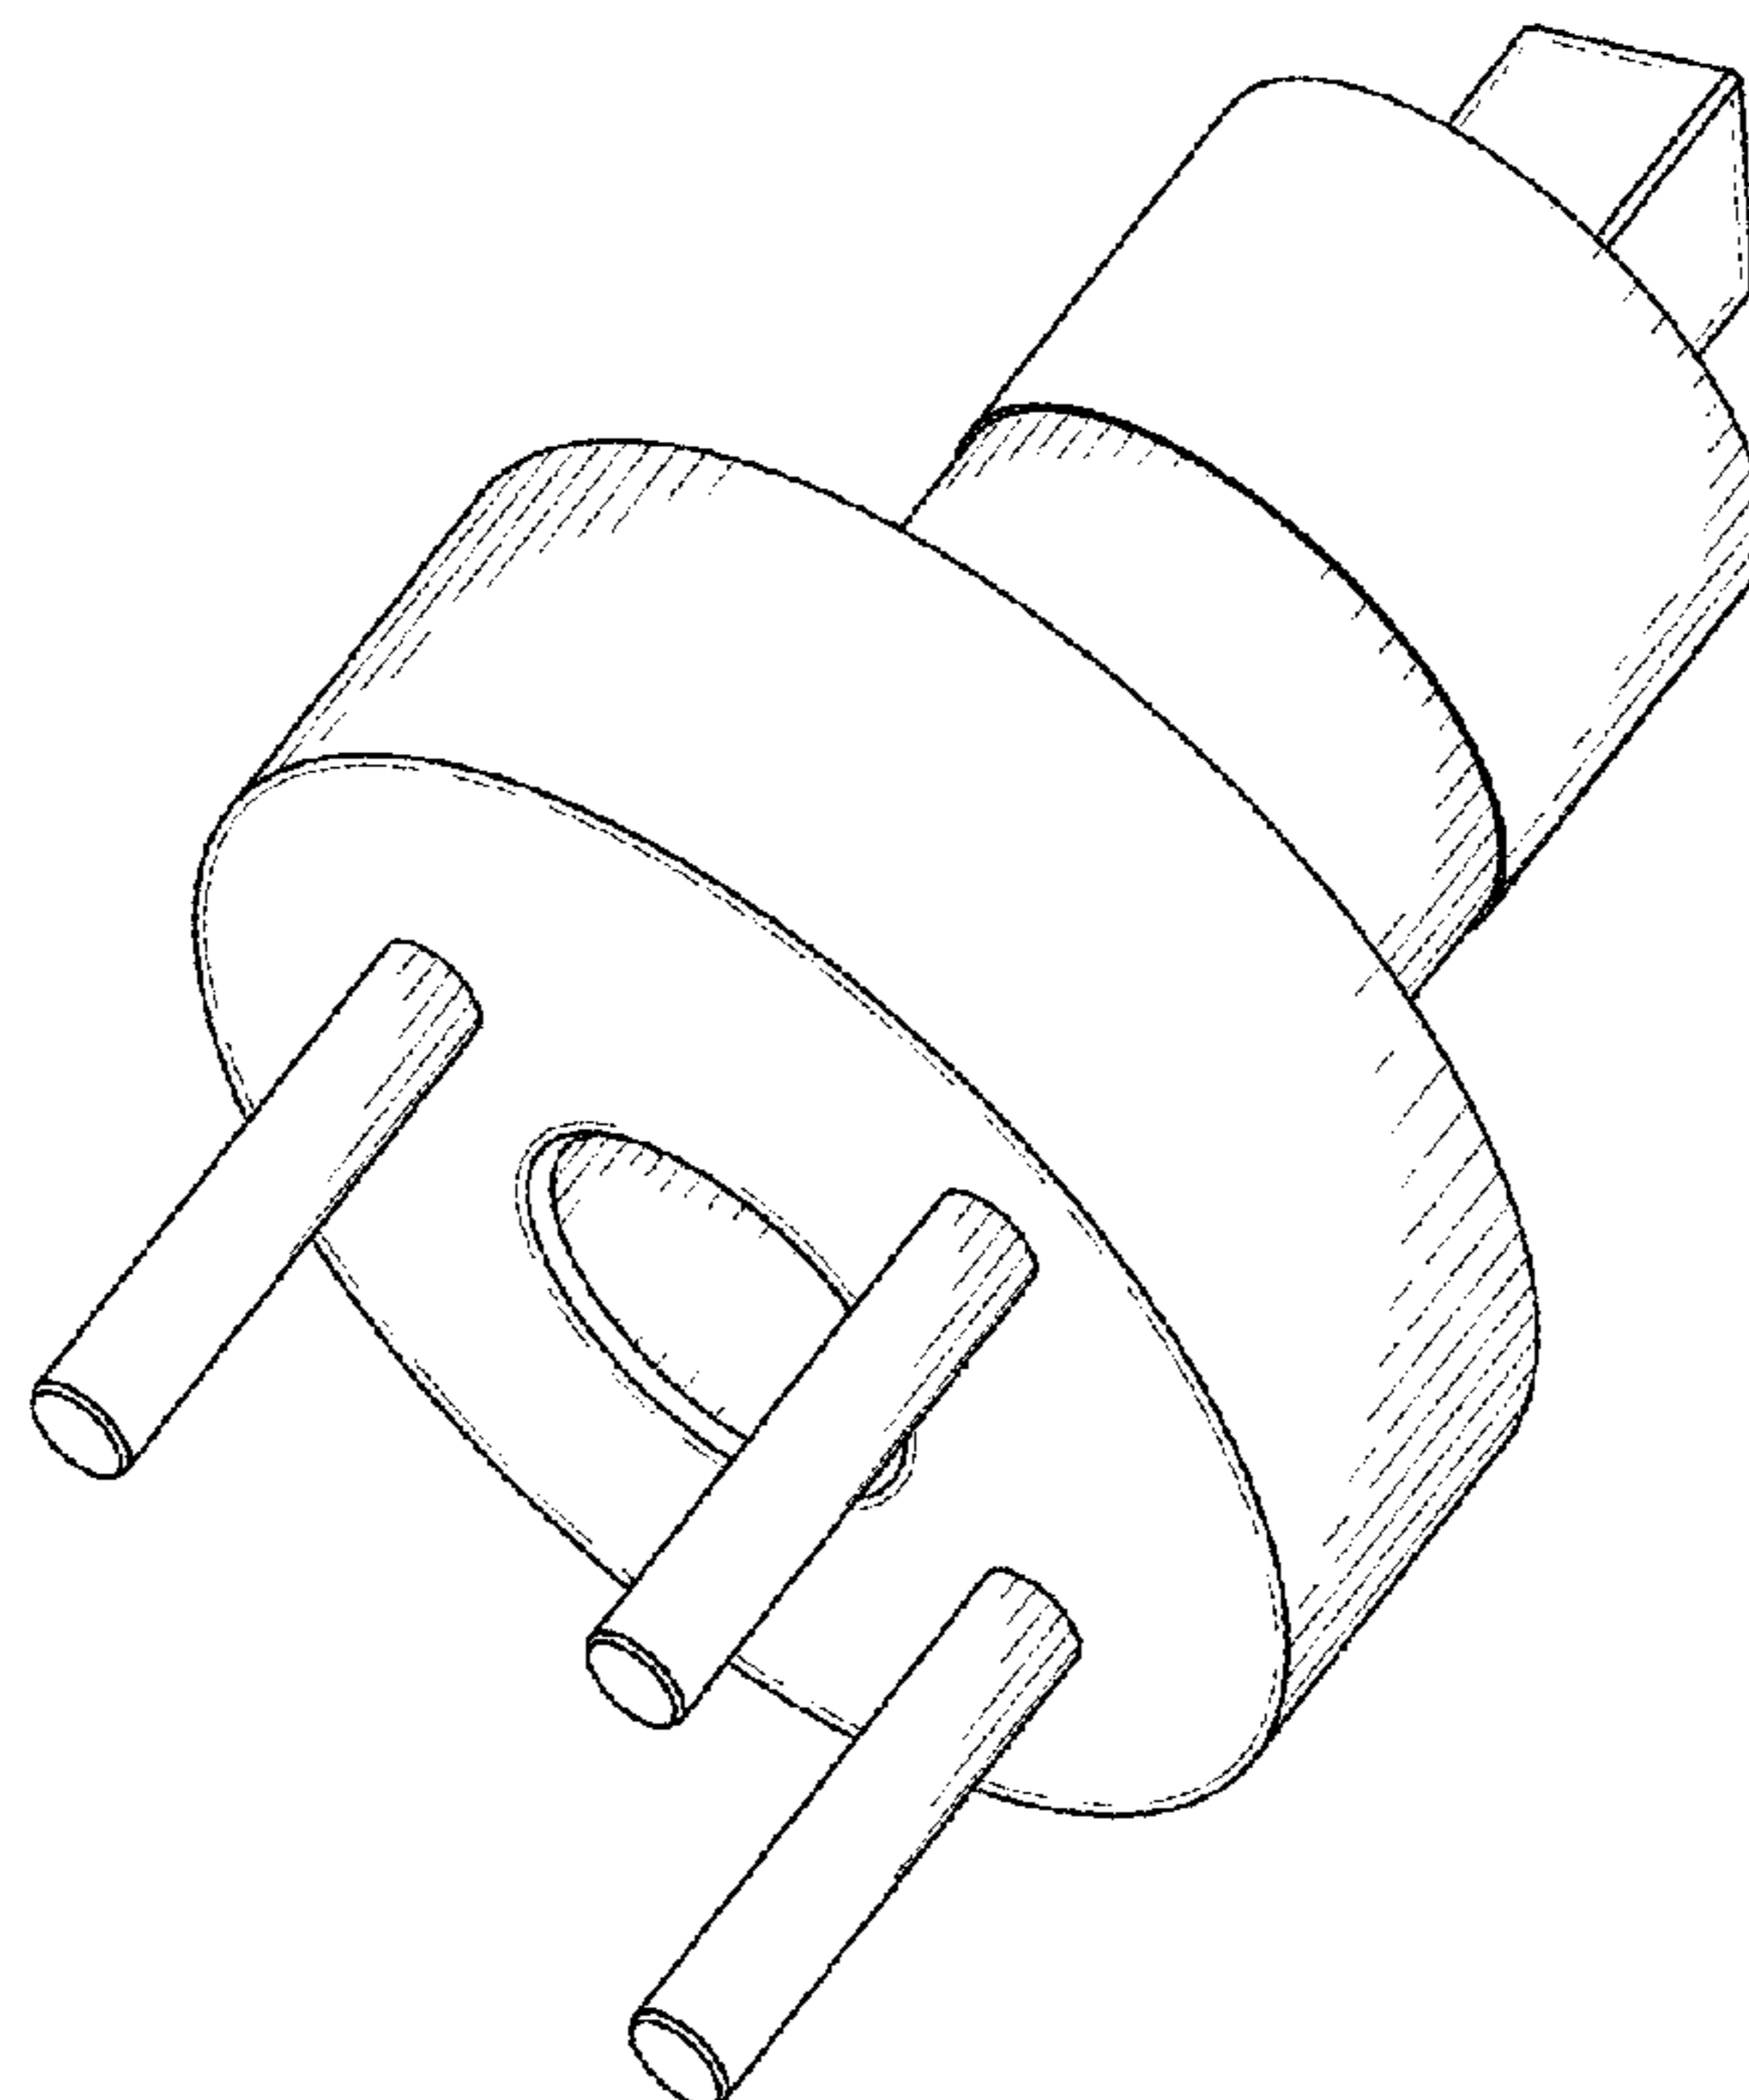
is a bottom perspective view of closed impeller tool showing my new design;
